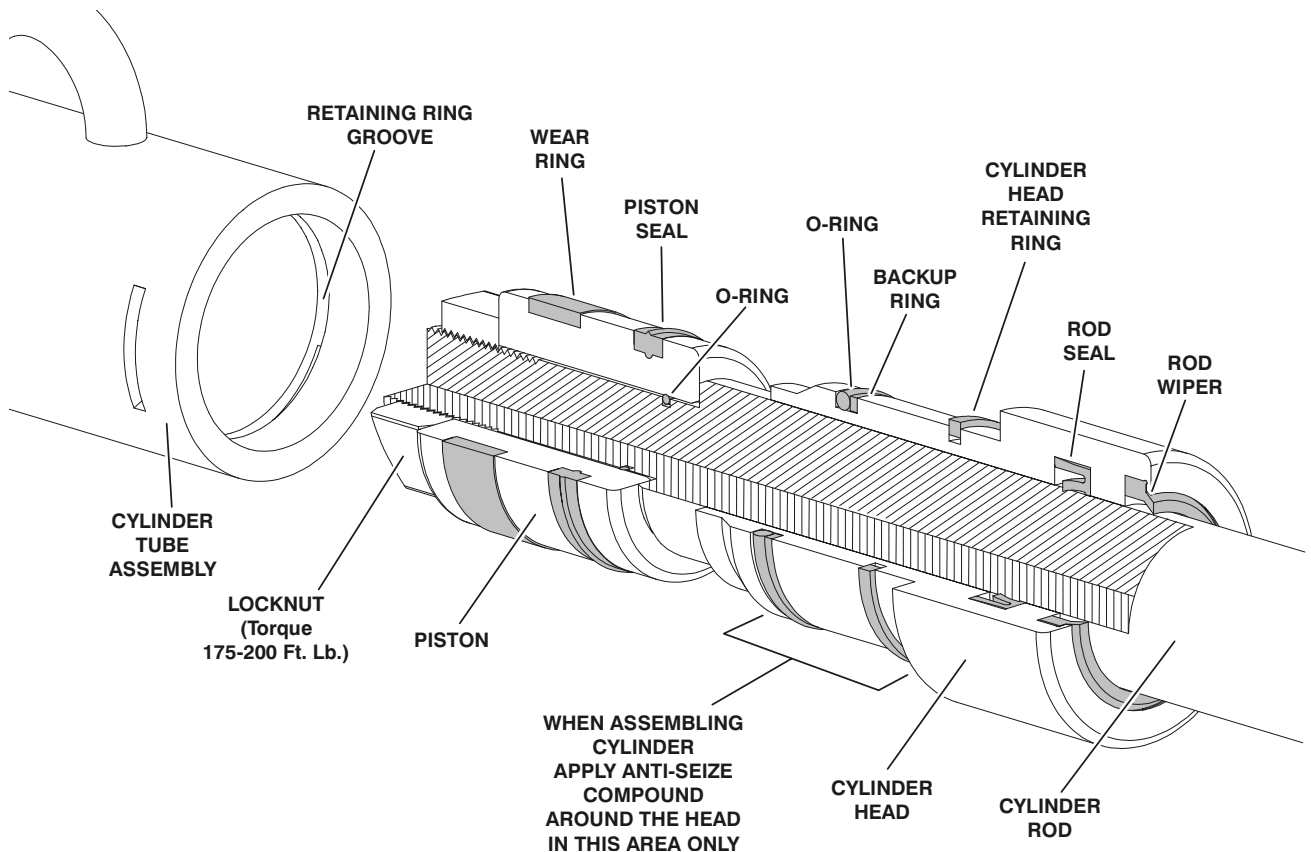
Lift Cylinder Internal Component Assembly Cross-Section.
